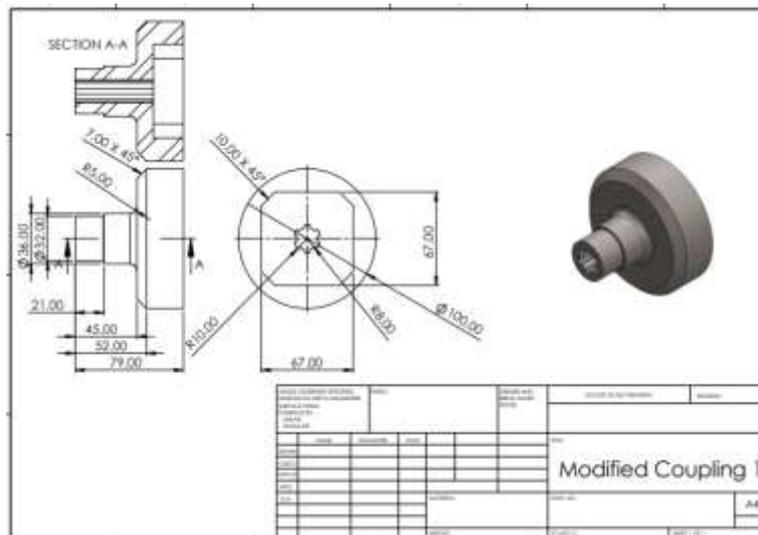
Solidworks Drawing of Modified Coupling Assembly (Male)
